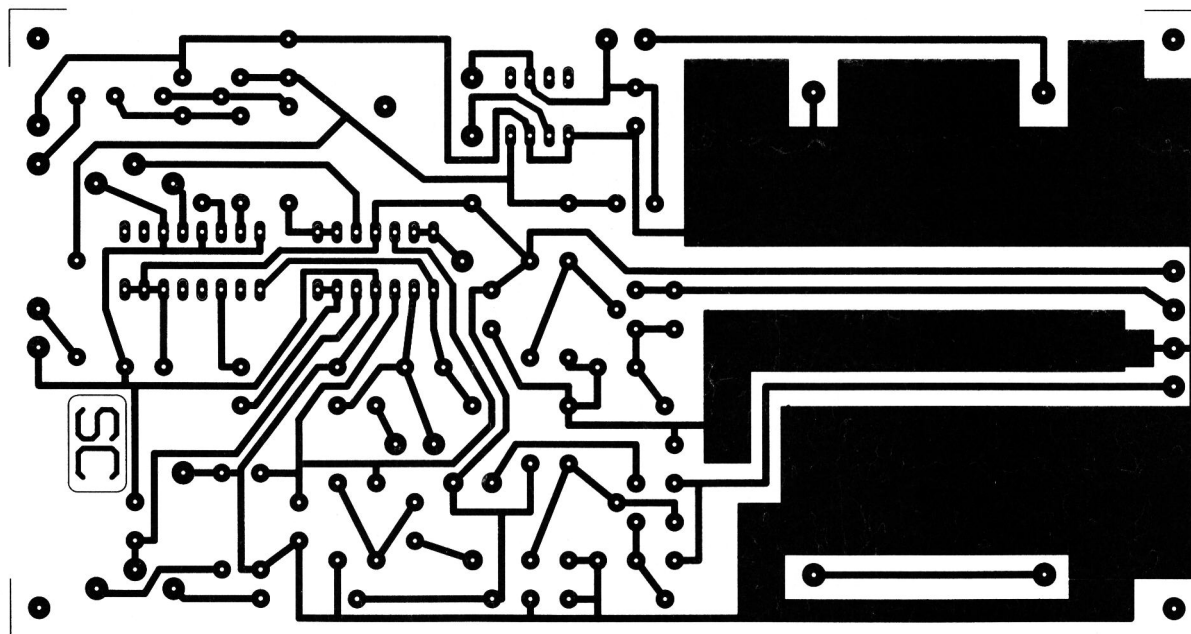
this is the full-size etching pattern for the PC board. Check the board for defects before installing any of the parts.
